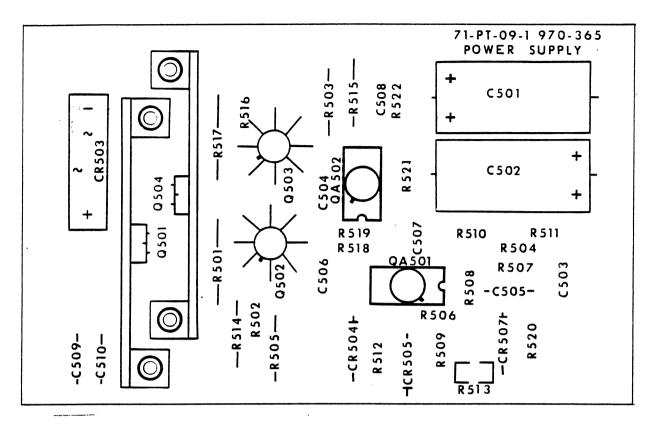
J1 Power Supply Printed-circuit Board, code 900-371.
